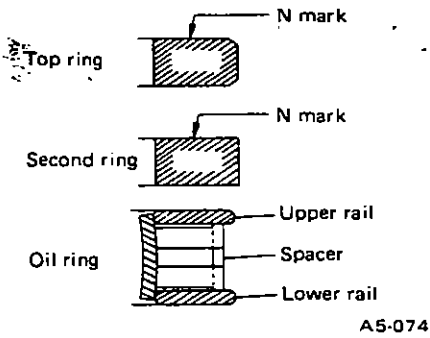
Cross section of piston rings (Nippon Piston Ring)
